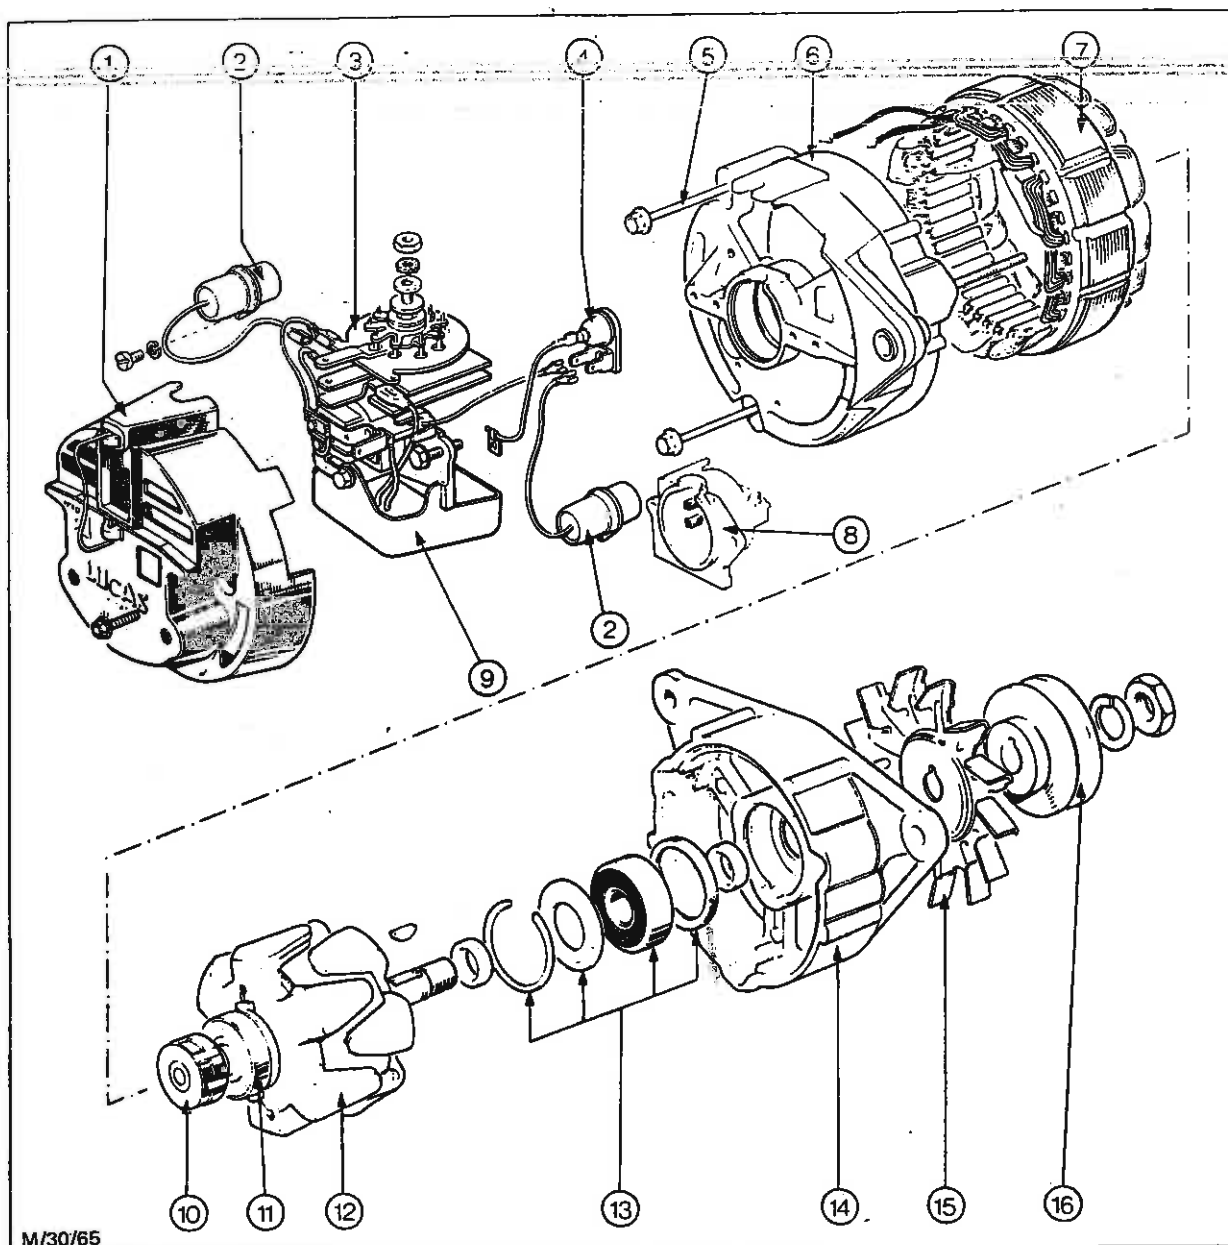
Exploded View of 17ACR'M Marine Alternator
